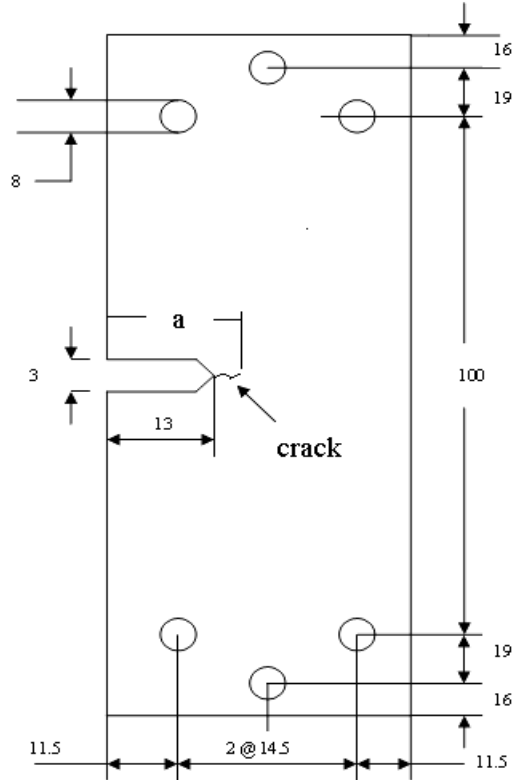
Single Edge Notch (SEN) Specimen geometry (LT orientation)
